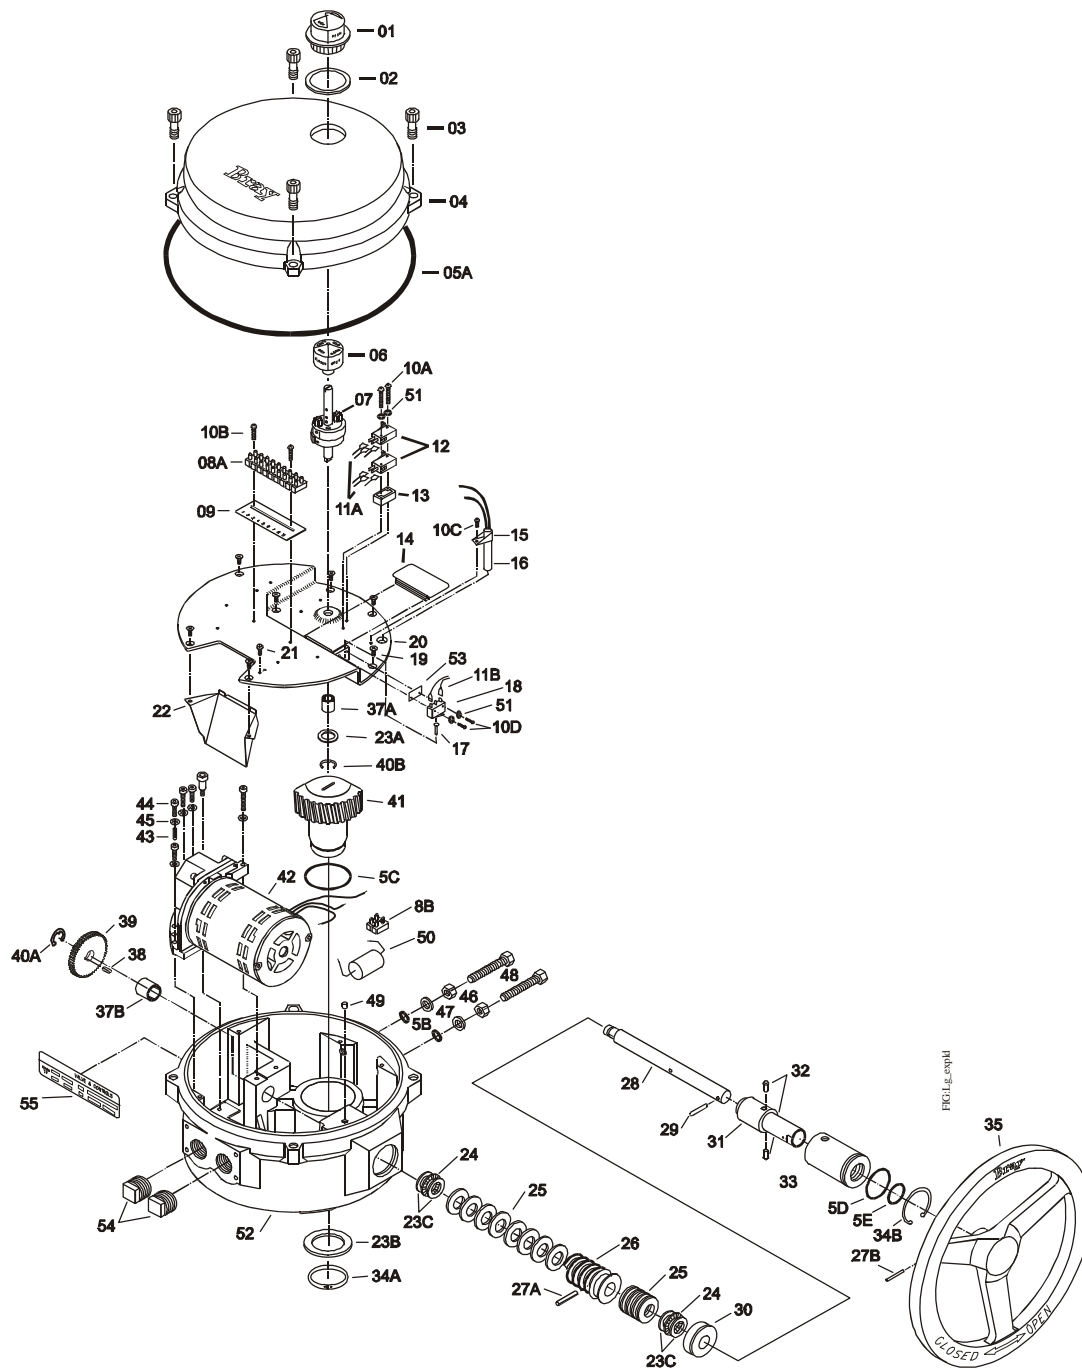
VA-9072 Two-Position Actuators, Exploded View
